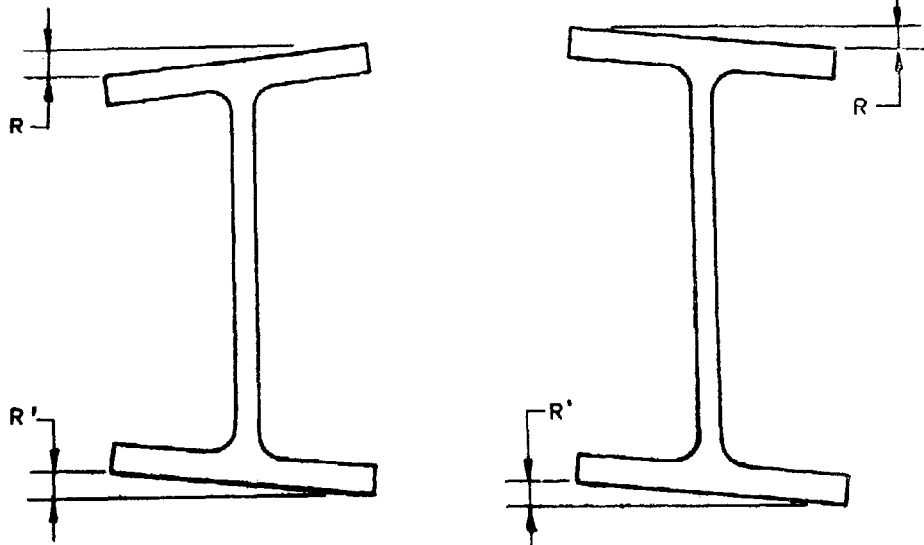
FLANGES OUT OF SQUARE OR OUT OF PARALLEL
